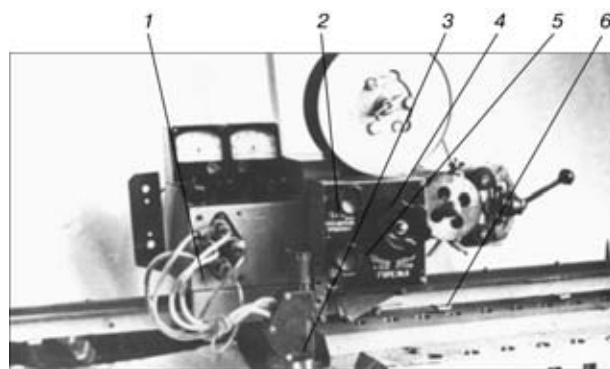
All-purpose automatic machine A-1342 for microplasma welding (for designations see the text)
